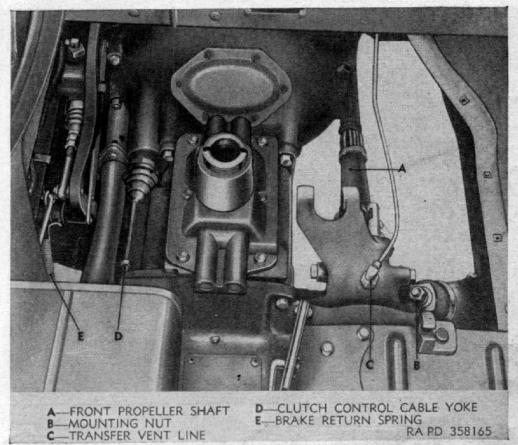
Disconnect points in passenger compartment with cover plates removed.
